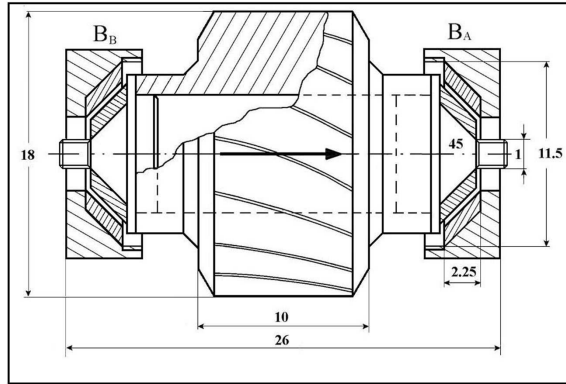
Micro-turbine with conic magnetic bearings; dimensions are expressed in millimeters.
